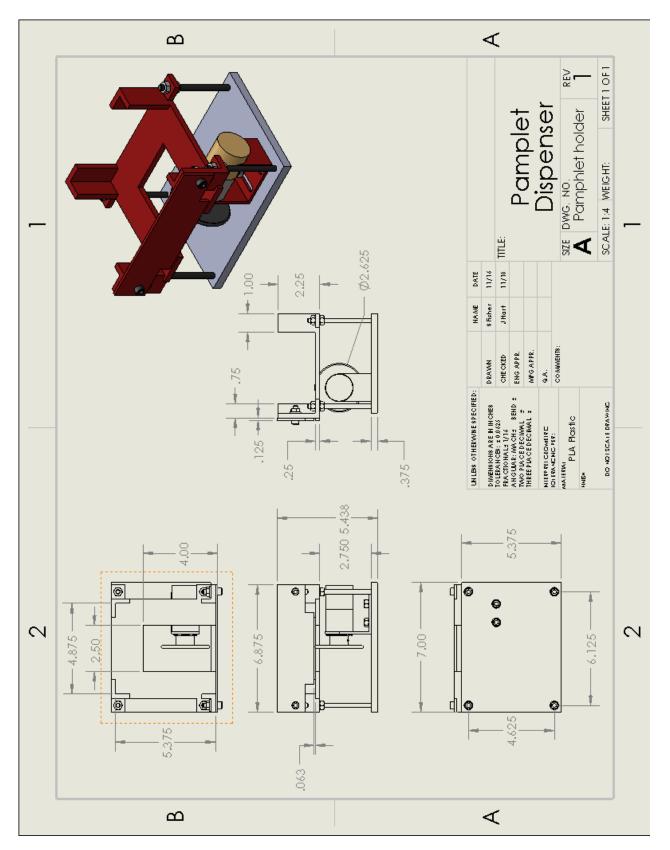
Prototype Pamphlet Dispenser Assembly Drawing (not to scale)
